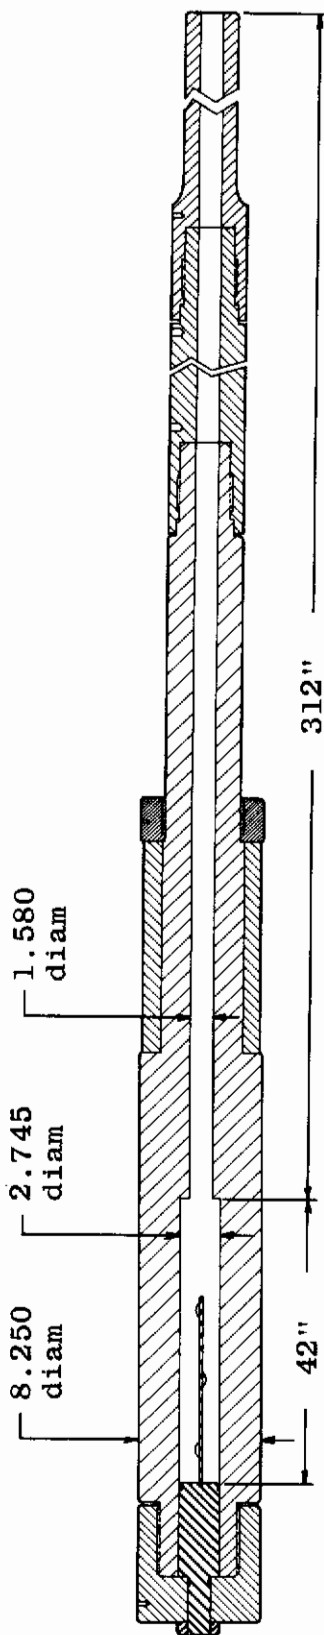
Schematic of Combustion Gun and Range and Combustion Combustion Gun Assembly
